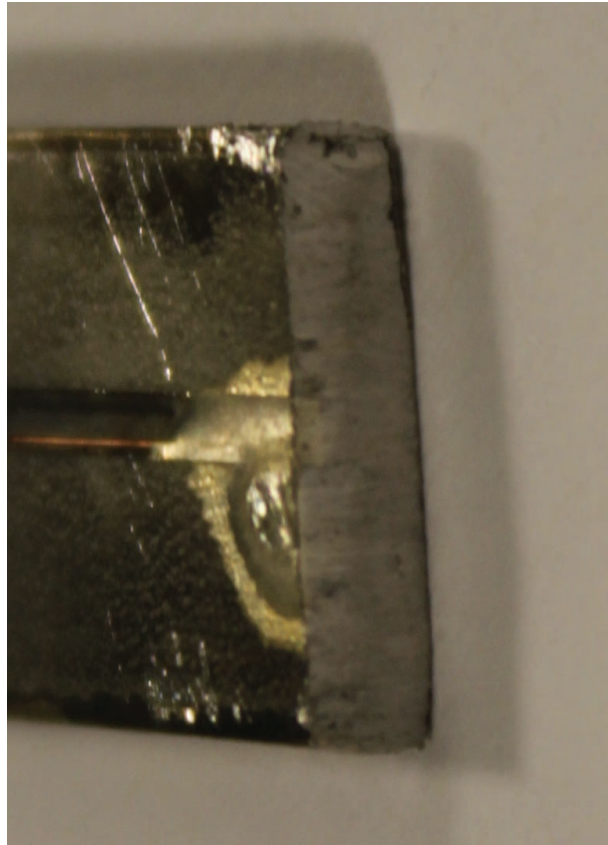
This is a face on cut-through image of the bottom piece of solder of Figure 5.11. The solder has some flow in the channel, but mostly over the side. The fibre is encased in the solder and has floated within the liquid solder.
